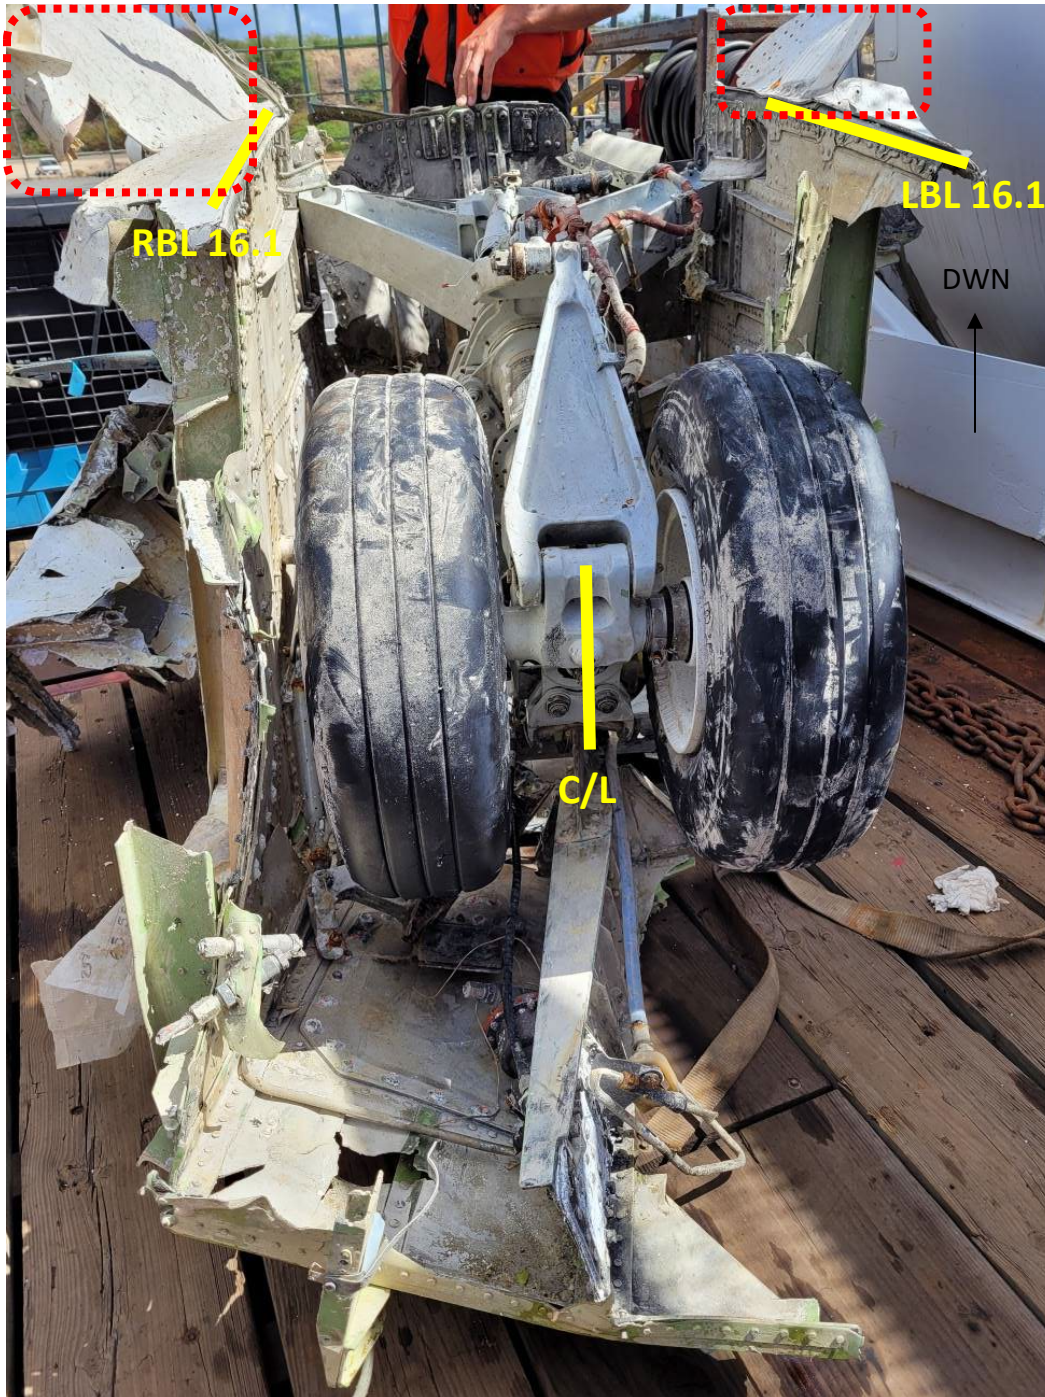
Aft side view of NLG and wheel well structure, looking forward (Boeing photo)
